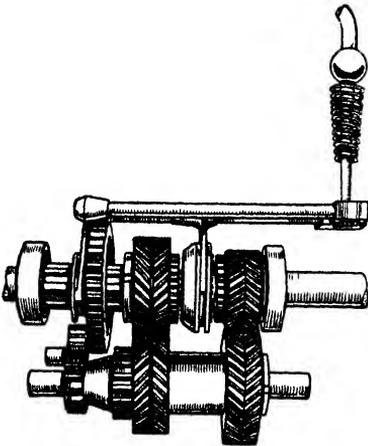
"Silent Second" Herring-bone gear Gear-box
